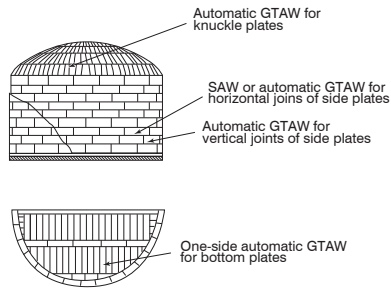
Typical applications of automatic welding processes for a LNG storage tank
